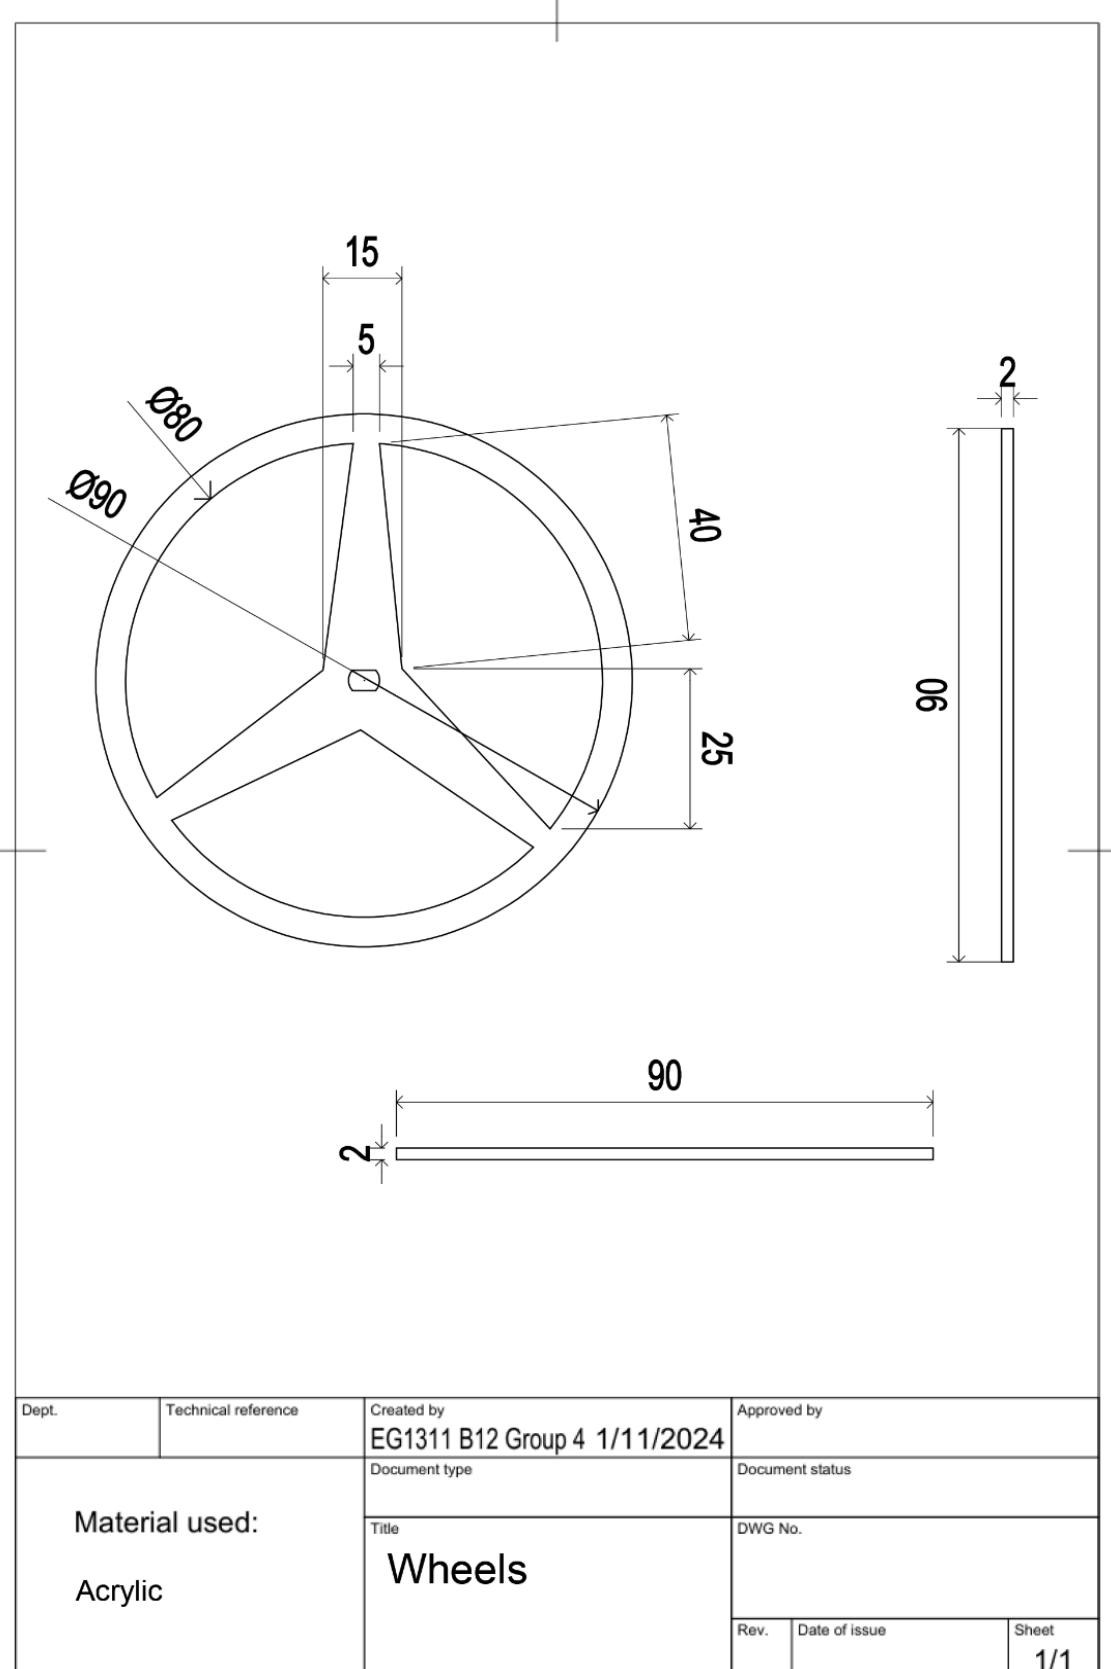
2D CAD Drawing Dimensions of Front Wheels
